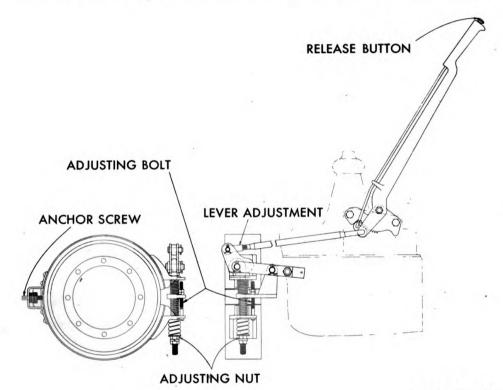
Checking Lining to Drum Clearance (Front 6 x 6 Shown)
